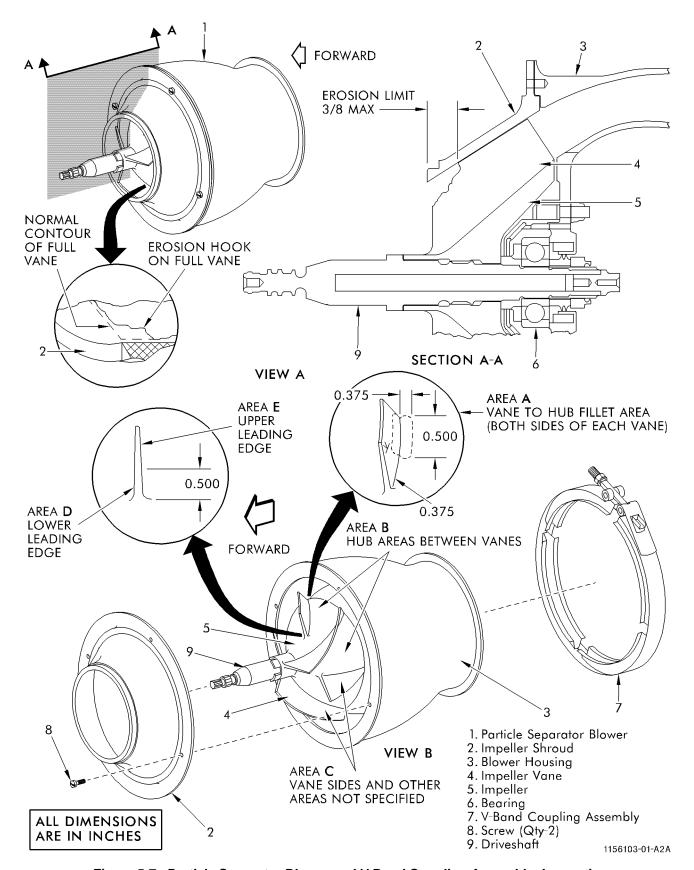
Particle Separator Blower and V-Band Coupling Assembly; Inspection
